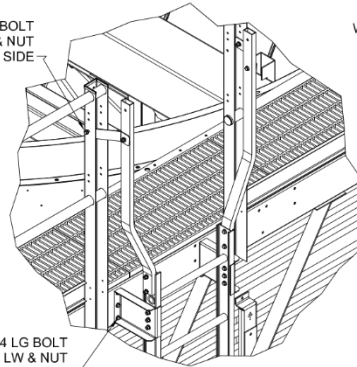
TLOPRR End Ladder to Fan Deck Installation
